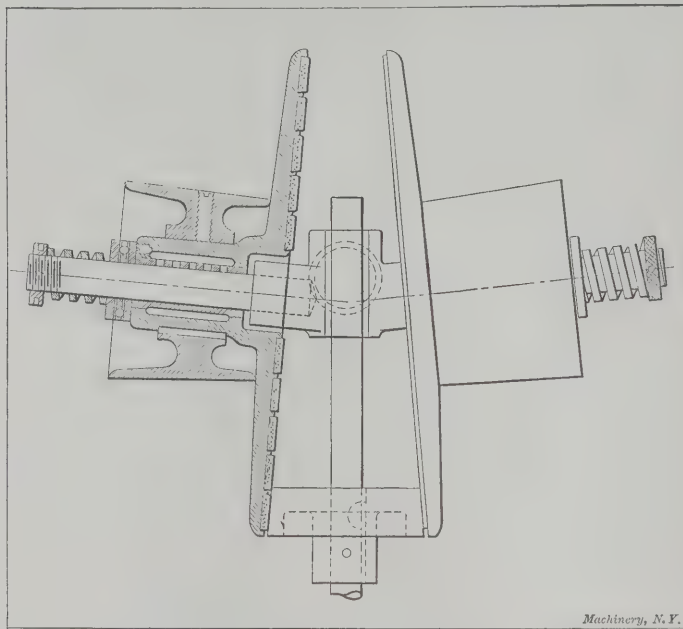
Friction Feed Disks and Mounting of Idler Pulleys
